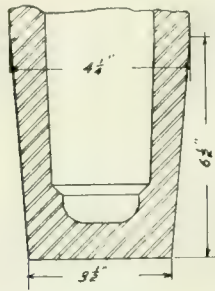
SHRAPNEL BILLET AFTER FIRST DRAWING OPERATION.
